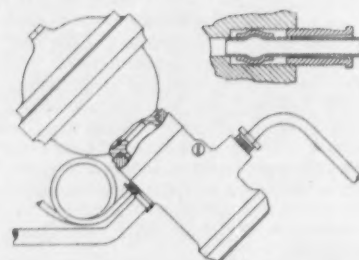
Hydraulic accumulator and distributor valve, and a section through a typical pipe joint
